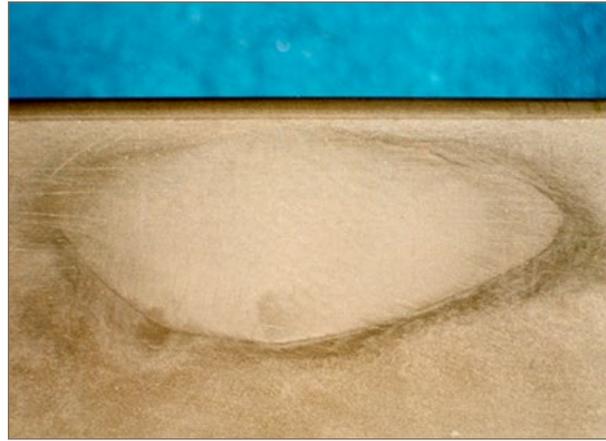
Picture of moulded body with a previously frozen gate caught up in the melt front to form a defect
